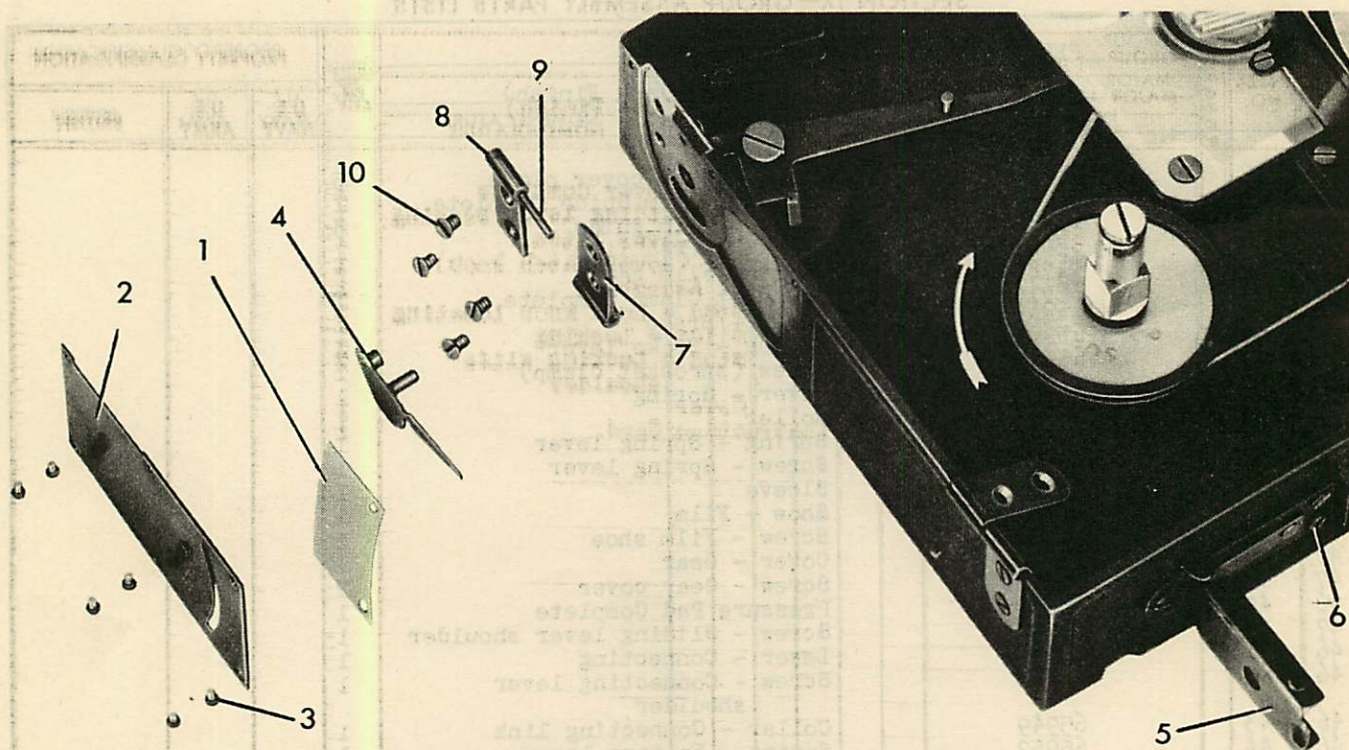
100-Foot Film Chamber Footage Indicator—Exploded
